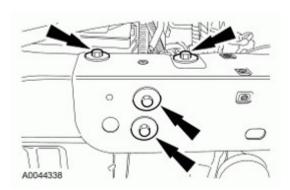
Locating Upper Radiator Support Bolts Courtesy of FORD MOTOR CO.
